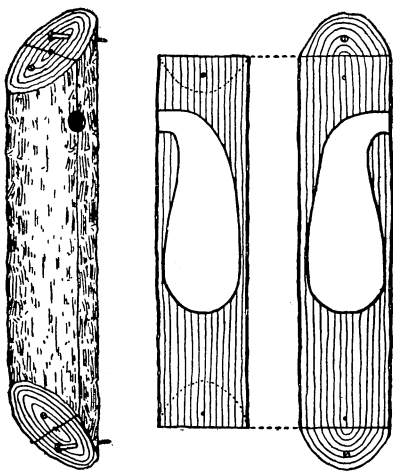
Logsplit and halves marked to be gouged out to form a cavity. Halves to be screwed together. Top should be covered with tin or zinc.
